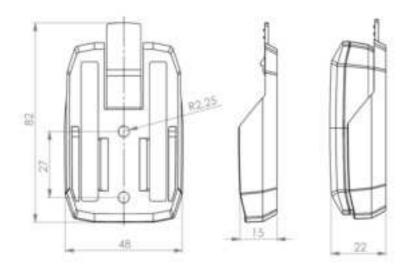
Dimensions of the CorivaTag Plus with Mounting Clip
